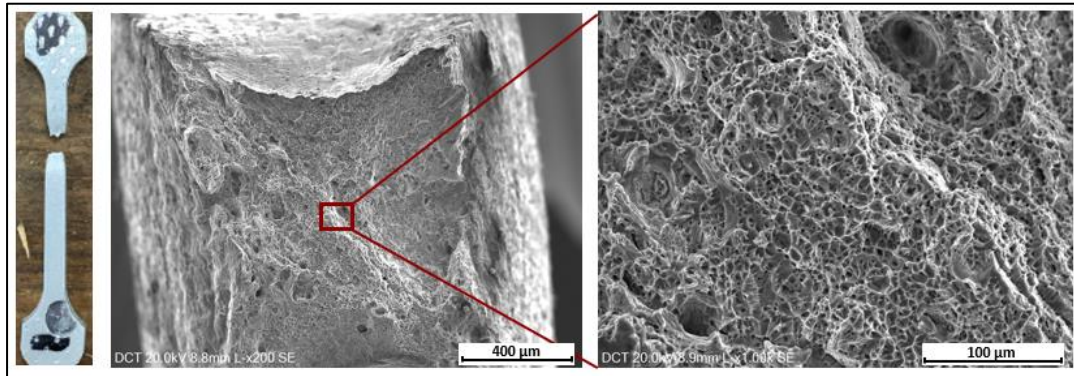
Fracture surface of the sample FM3.
